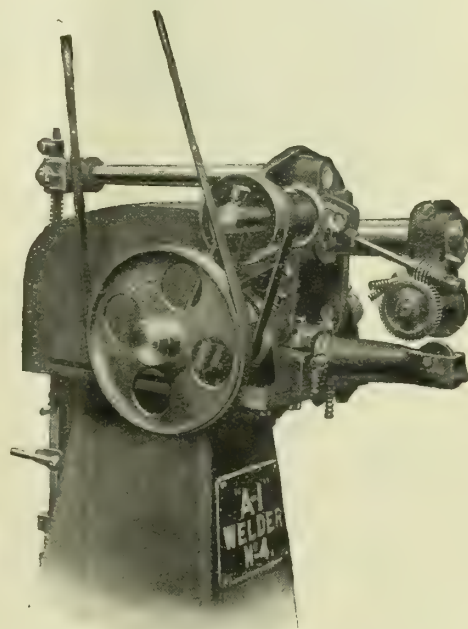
A SEAM WELDING ATTACHMENT FITTED TO A SPOT WELDER. (THE A-I MANUFACTURING COY.)
